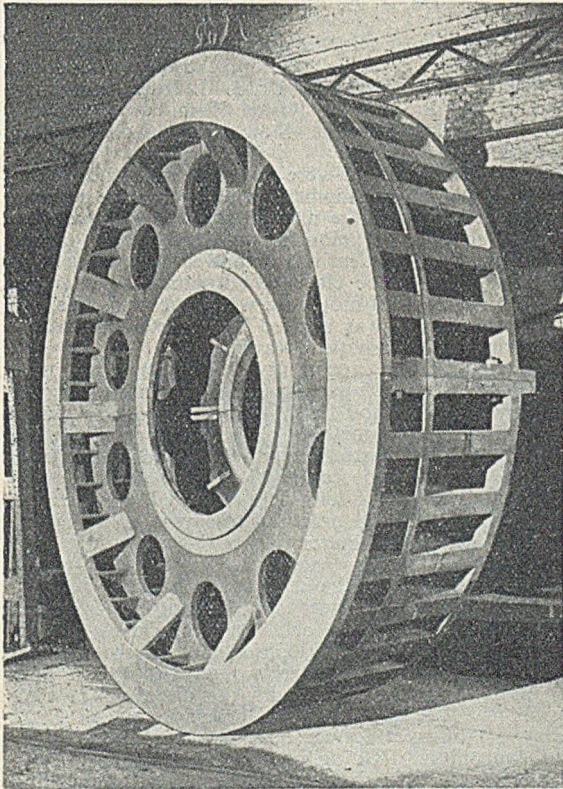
STEEL ROTOR WEIGHING 28 TONS ASSEMBLED FROM FOUR CASTINGS.
